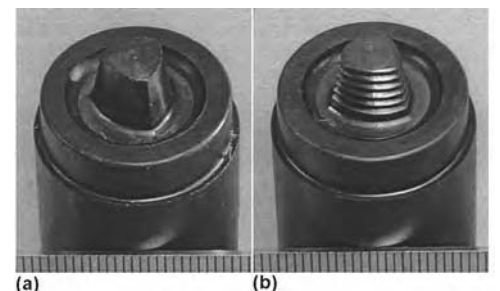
Trivex tools with and without threads. Courtesy of The Welding Institute
